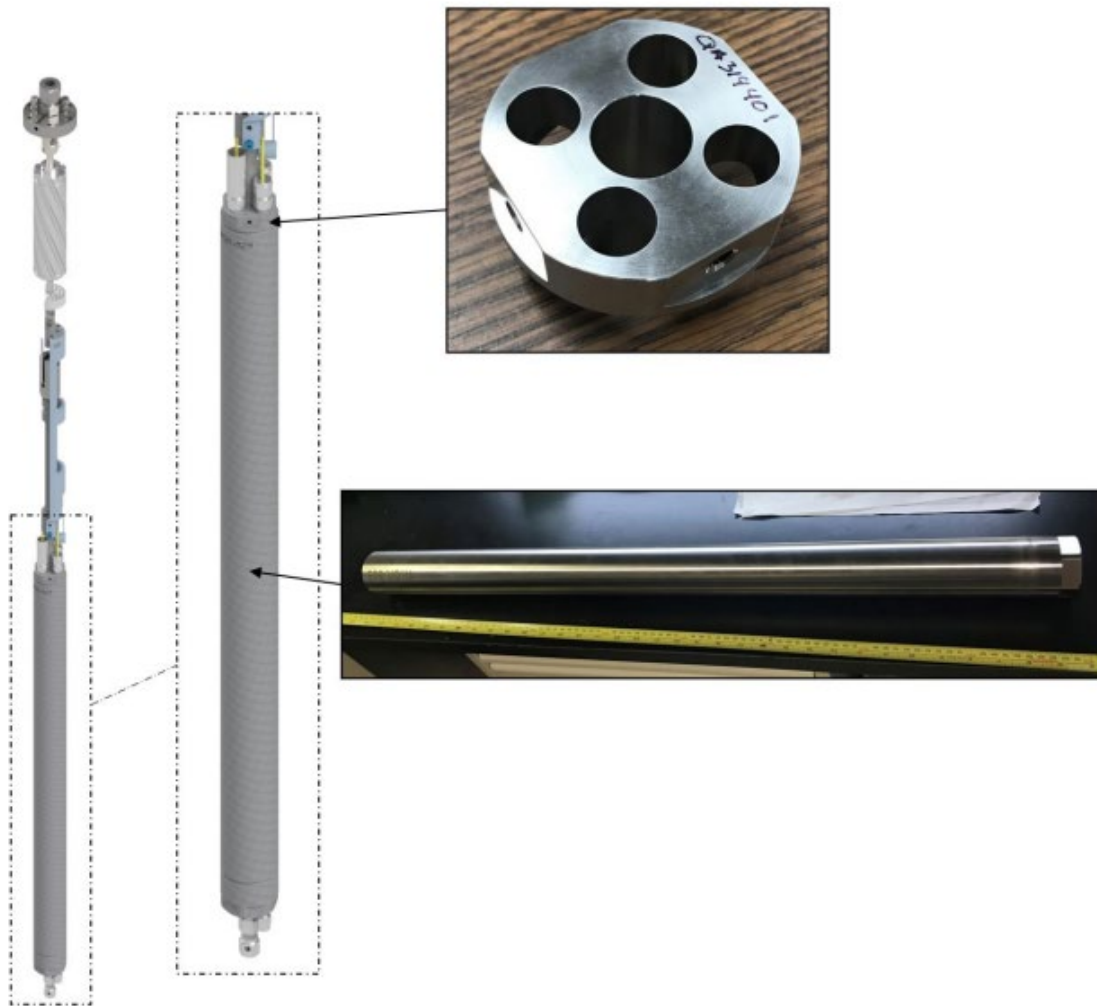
Fabricated capsule ready for final assembly and pictorial description in the THOR assembly.
